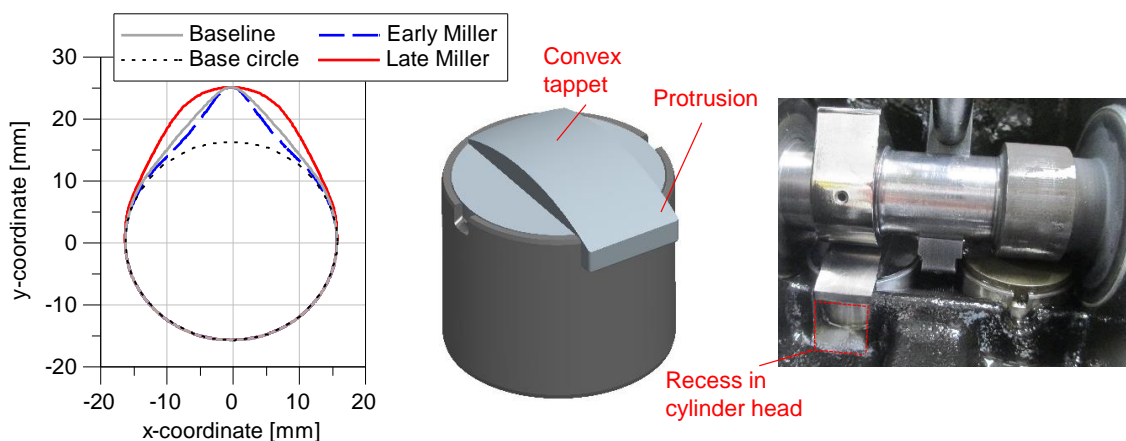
Cam profile of the baseline, early and late Miller valve timing (left); convex tappet to realise early Miller (centre); assembled valve train of early Miller configuration (right)
